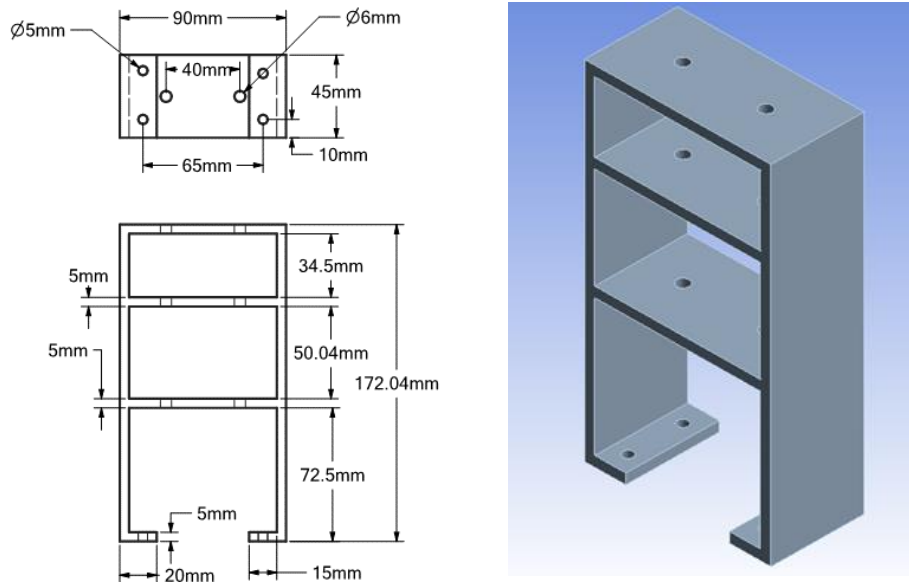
(A) Geometrical representation of solenoid stands B) 3D of solenoid stand
